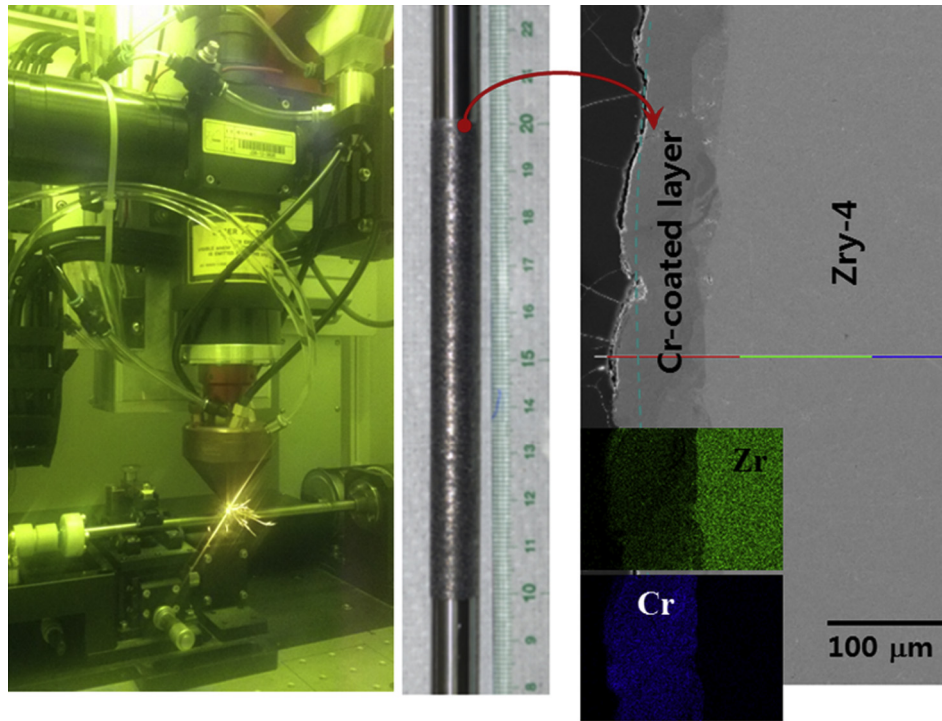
3D laser coating process supplying the Cr powder, surface appearance, and cross-sectional analysis of the Cr-coated Zircaloy-4 cladding tube [38].
